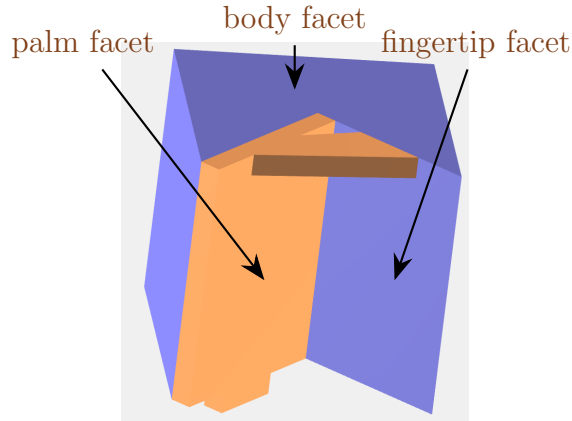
A non-convex workpiece with its degenerated fixture.
